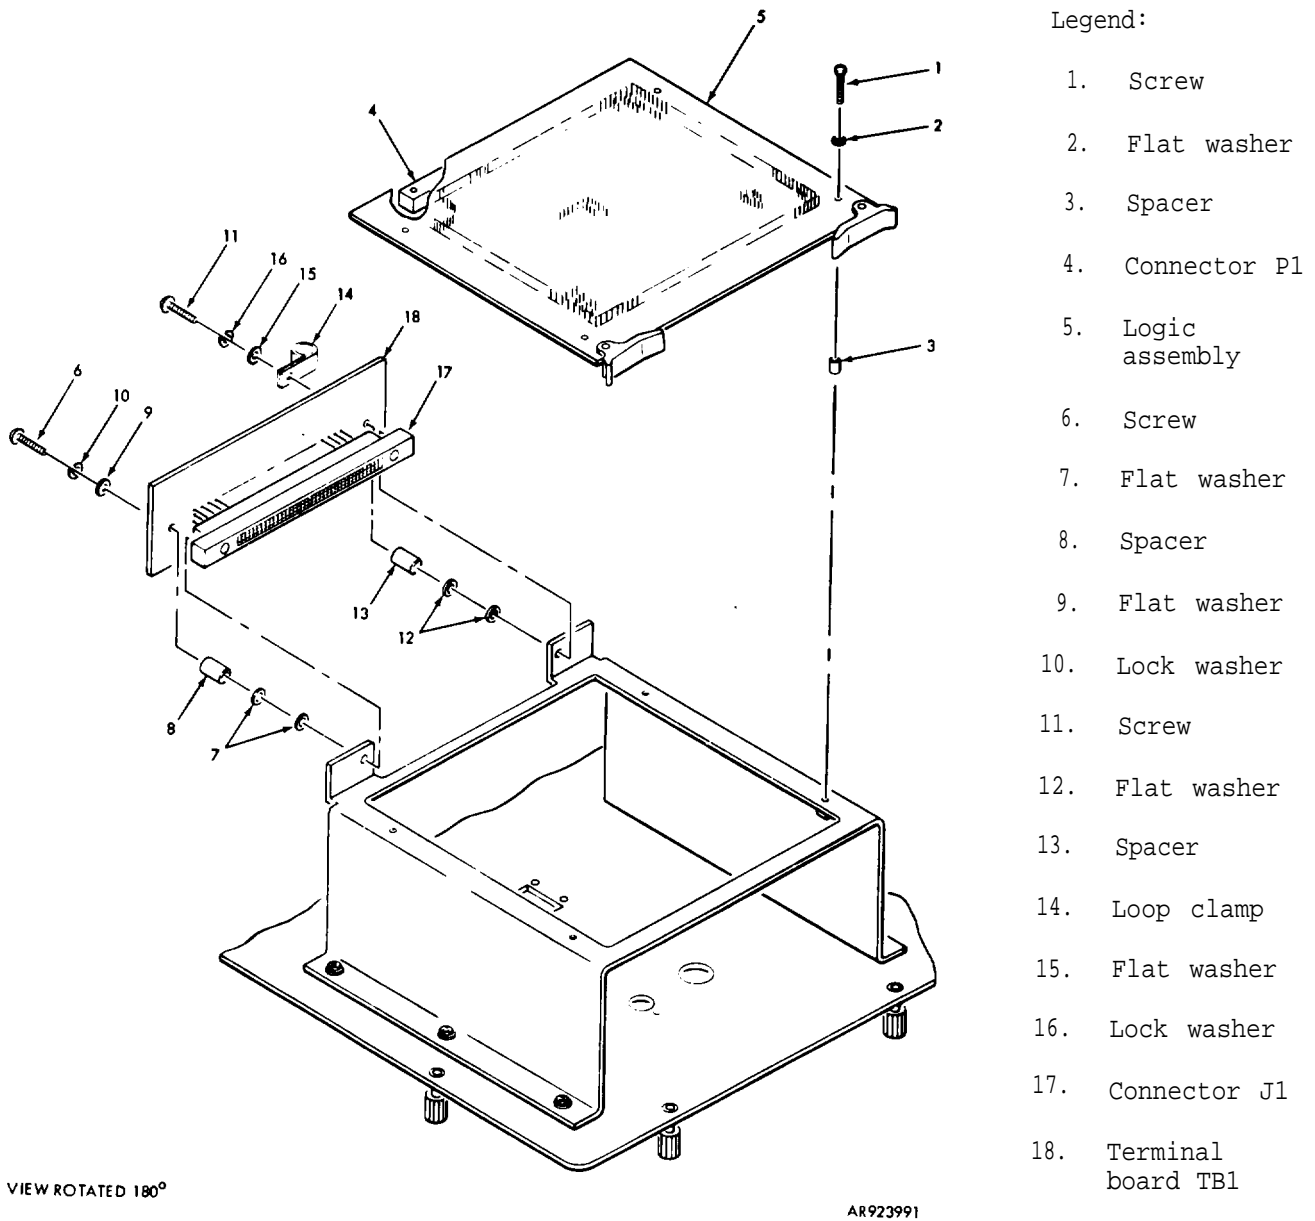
Logic Assembly and Terminal Board TB1, Removal
